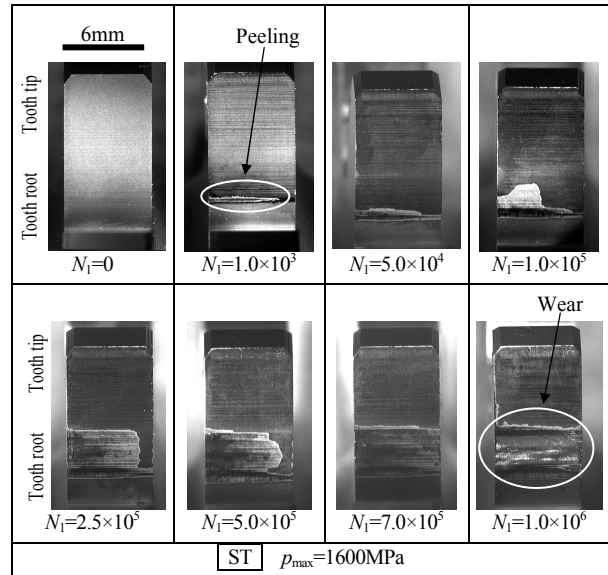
Tooth surfaces of the test pinion at the early stage of the gear test.
